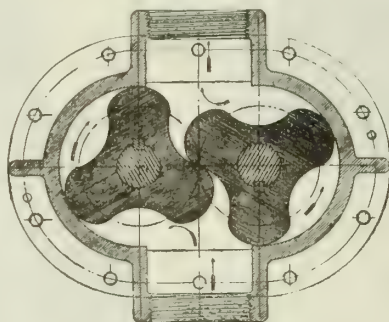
SECTION THROUGH IMPELLERS AND CASE
